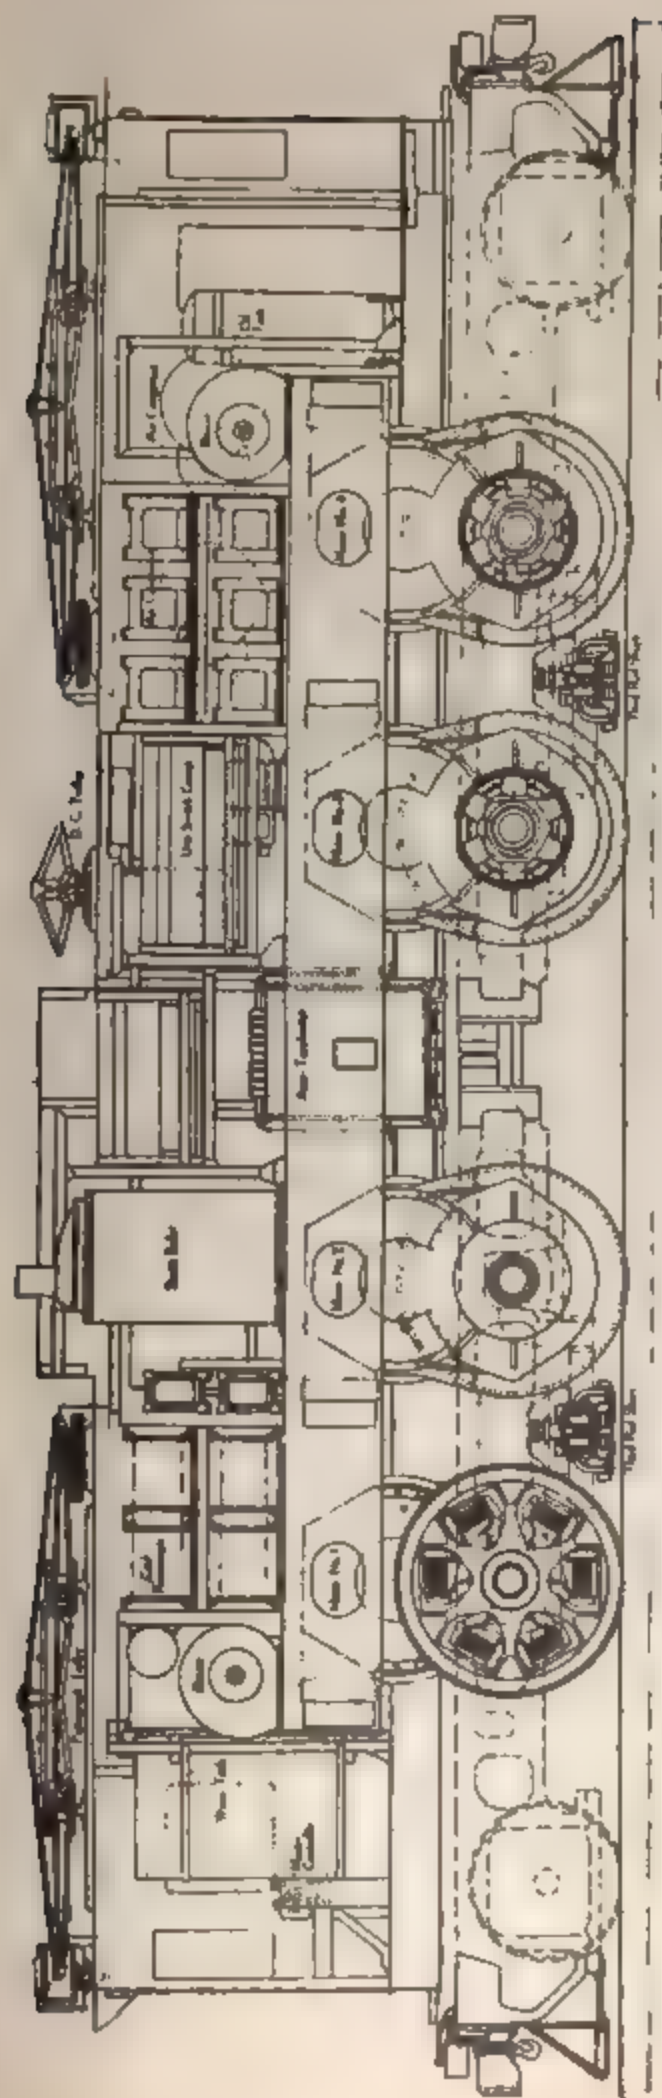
Sectional view of locomotive pictured in Fig. 1077, showing location of motors.
